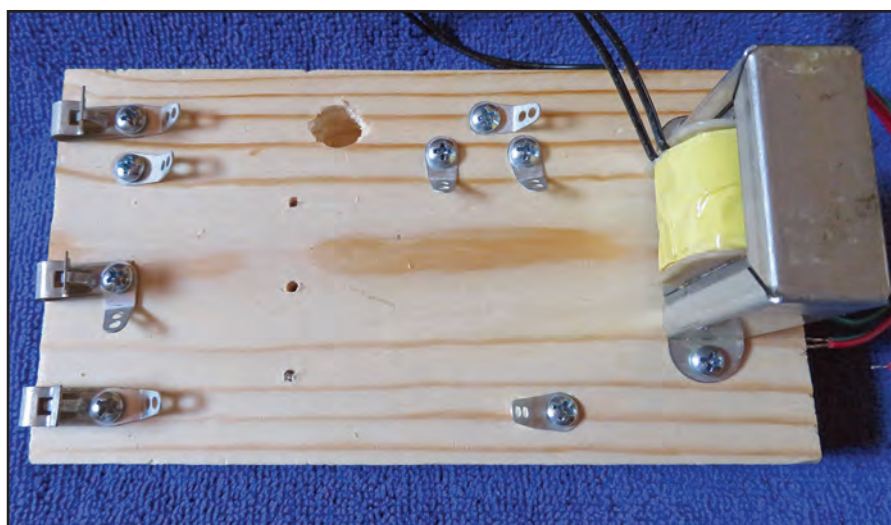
Photo C. The transformer, solder lugs, and Fahnestock clips are mounted to the board.
